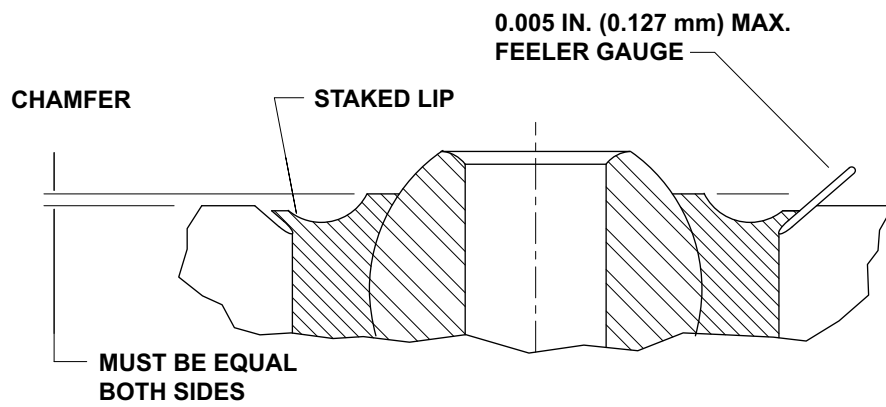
Roll or Anvil Staking Pregrooved Bearings
